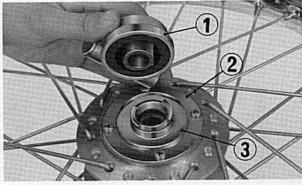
(1) Speedometer gear box (2) Gear box retainer cover (3) Gear box retainer
